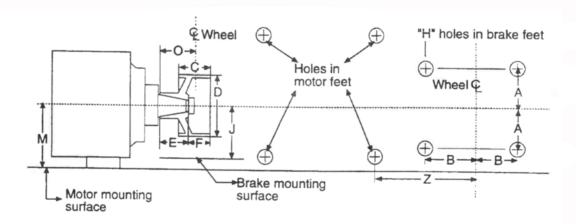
Wheel and shoe brake configuration. Refer to Table 4 to determine actual dimensions for the applicable frame size.
